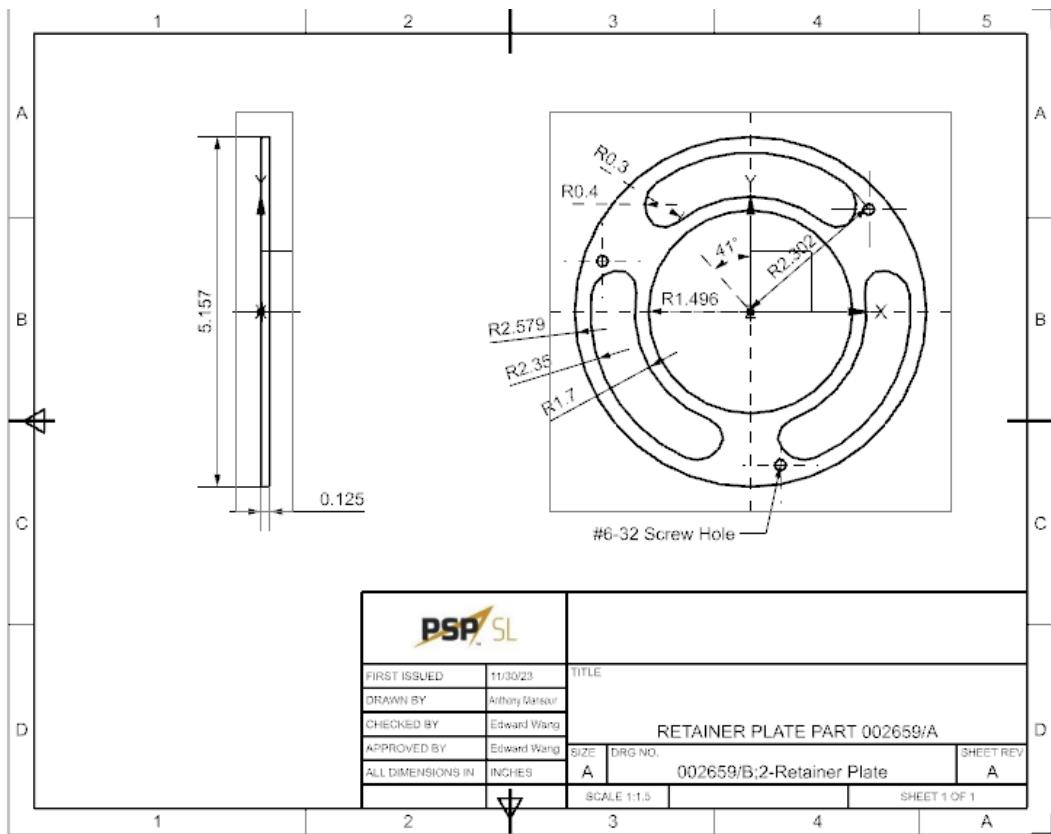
Technical Drawing for Motor Retainer Plate
